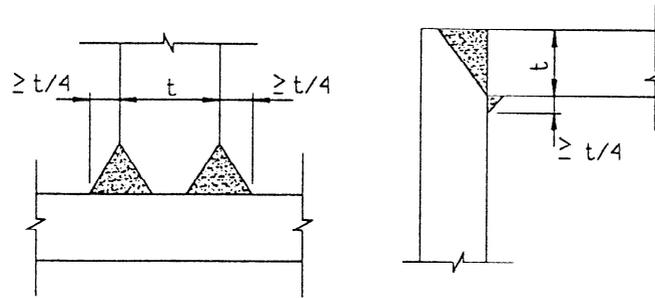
Reinforcement for T- and corner joints
